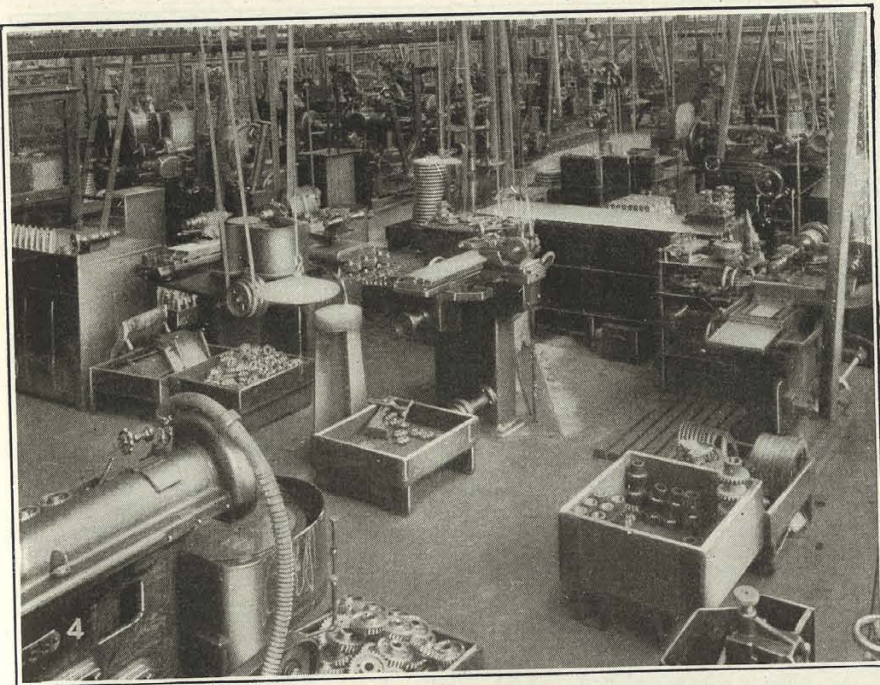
Gear-cutting department for spur, straight-bevel and helical gears. There are some grinding machines in this department, on which the faces of gears are ground
